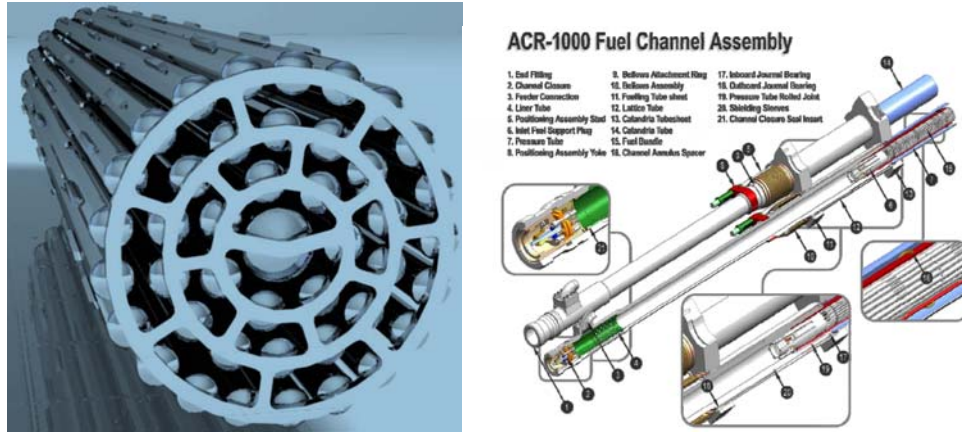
SEU43-ACR1000 Fuel bundle and Fuel Channel Assembly
